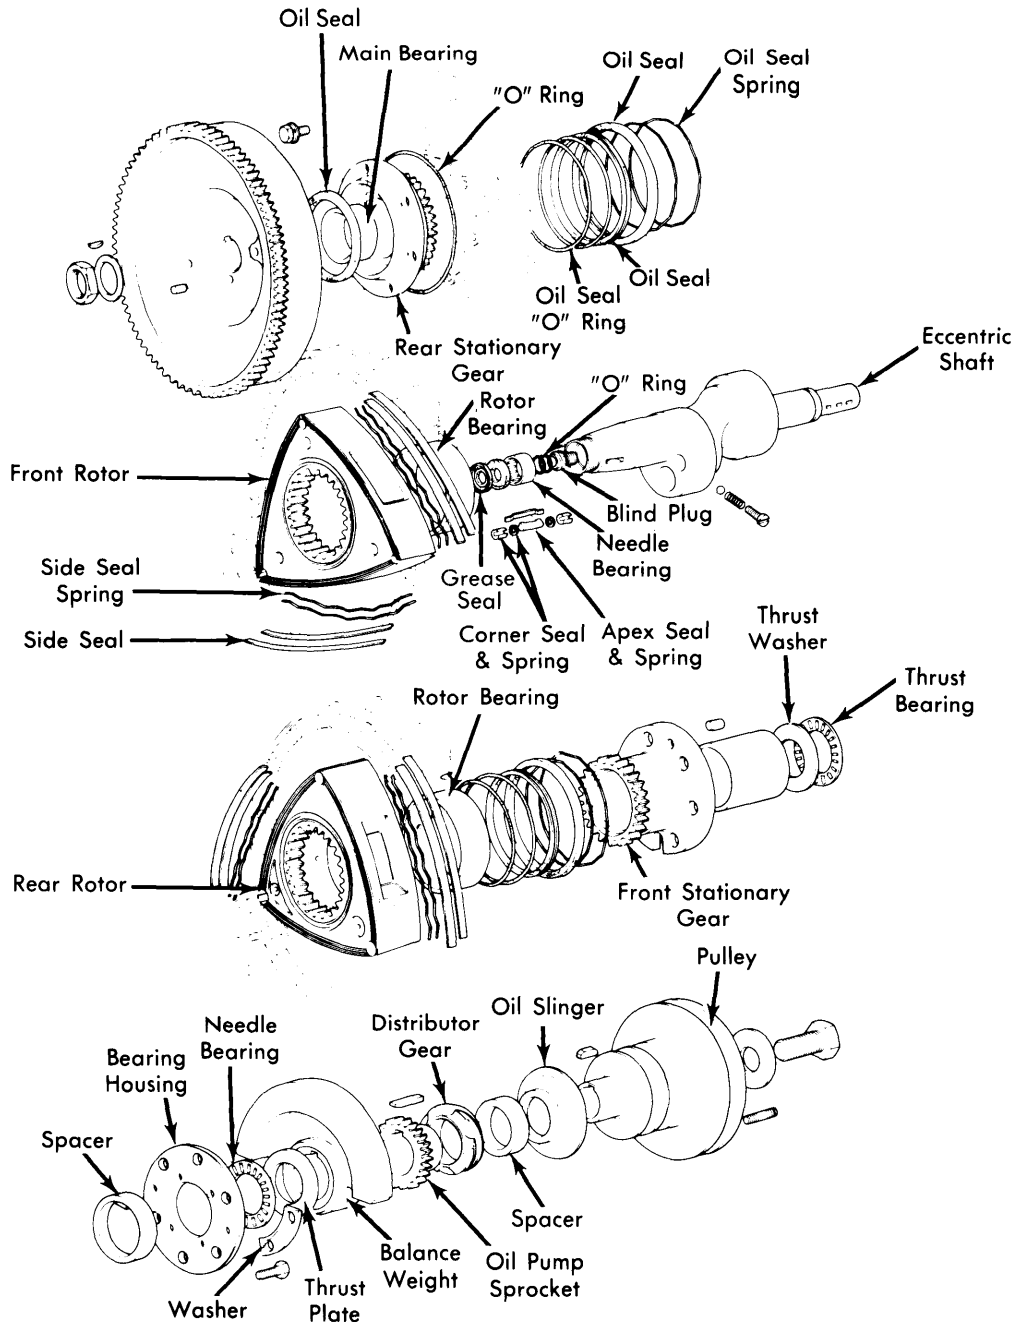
Exploded View of Rotors & Eccentric Shaft Assembly
